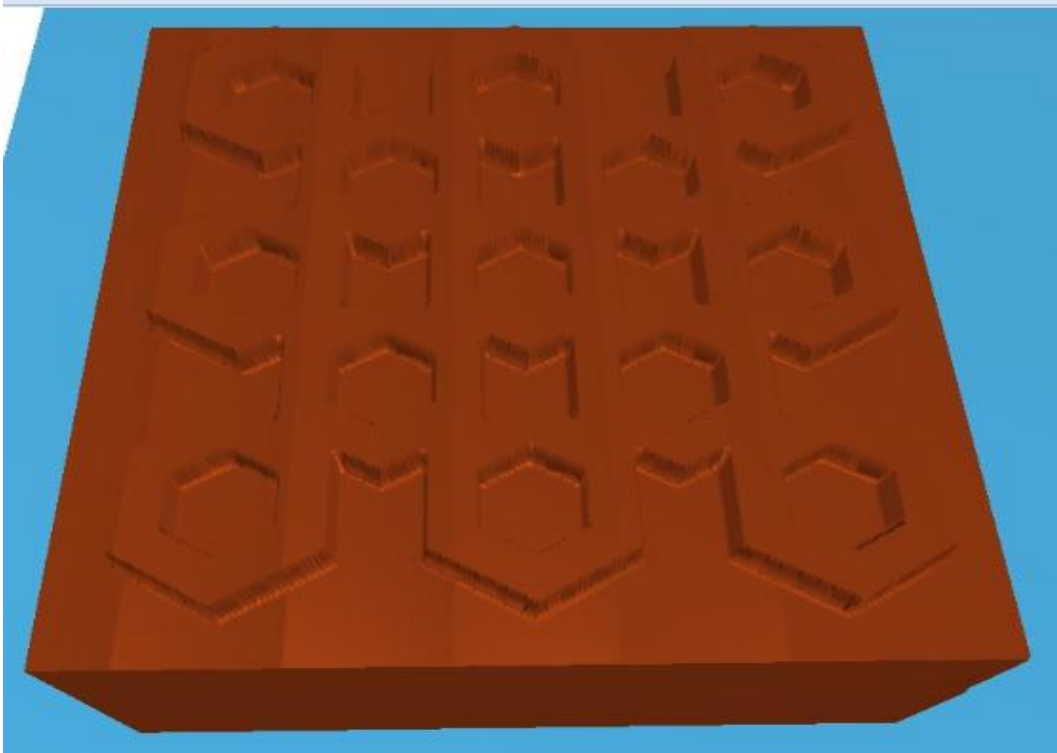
Pencil Cutting for 0.1 Side Step
